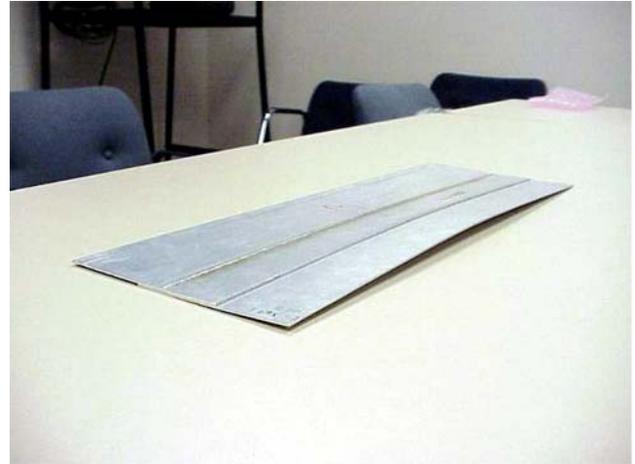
Aluminum coupon with distortion in the sheet caused by the laser welding process.
